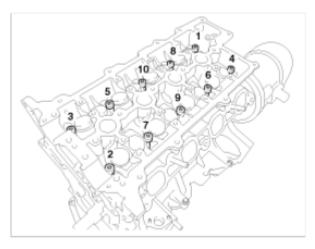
Identifying Cylinder Head Bolts Loosening Sequence Courtesy of HYUNDAI MOTOR AMERICA
